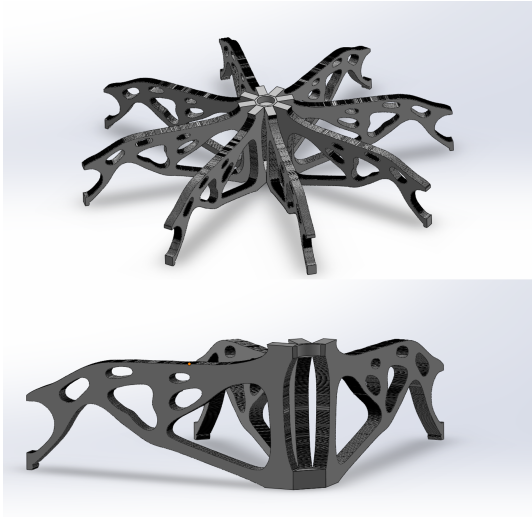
SECTION VIEW AND CIRCULAR ASSEMBLED
